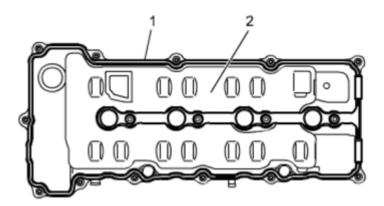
Identifying Cylinder Head Cover Gasket Courtesy of SUZUKI OF AMERICA CORP.
